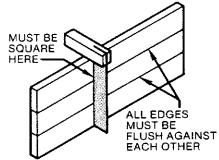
When jointed boards are butted edge-to-edge, they should have these qualities.
